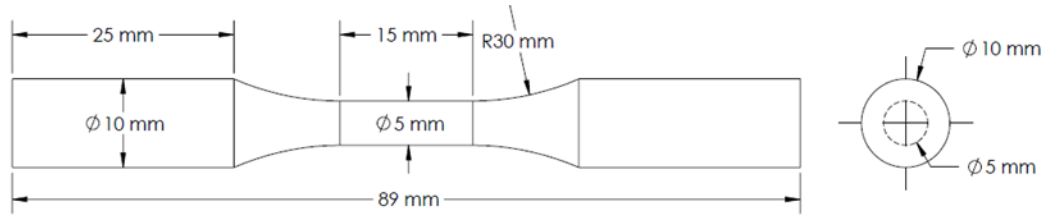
Specimen geometry and dimensions for strain-controlled fatigue tests.
